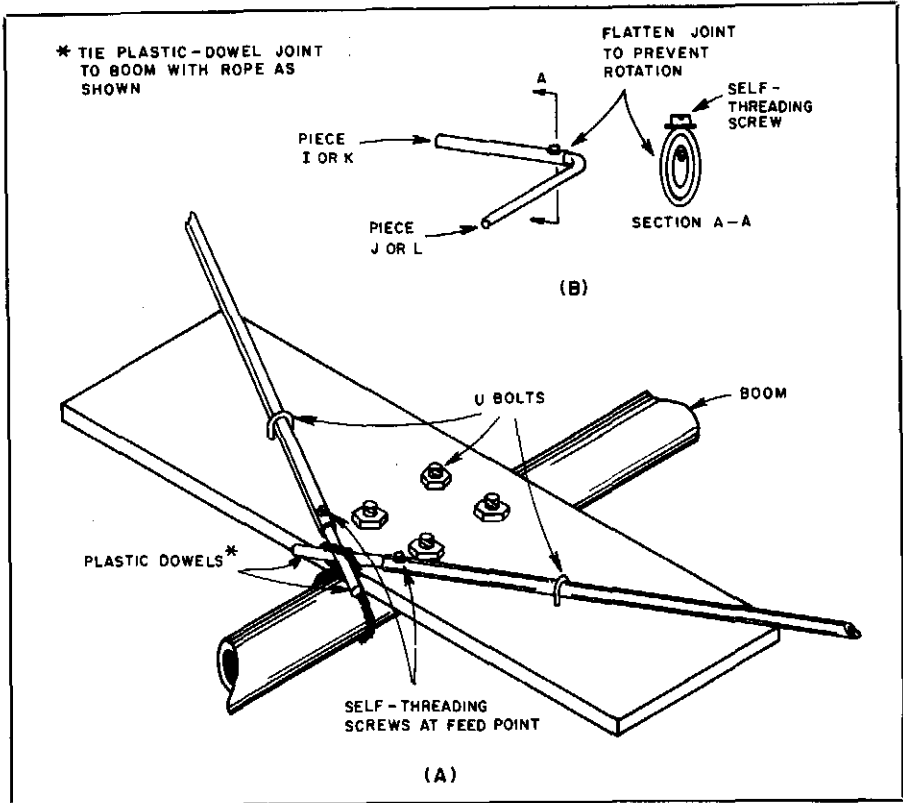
Details of the mounting-plate assembly (A) and element joint (B). Flatten the joint slightly after assembly to prevent rotation.
